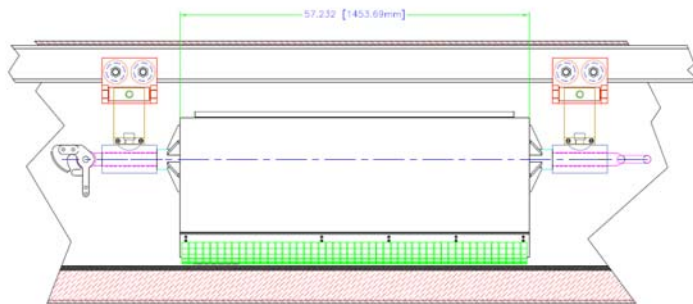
Overview of pipe module, I-beam suspension, motor winding, and capsule pipe.
